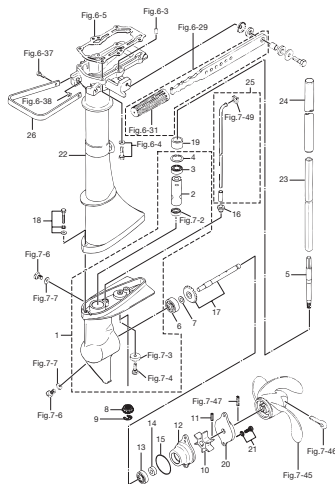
DRIVE SHAFT HOUSING · TILLER HANDLE (M3.5B2)
